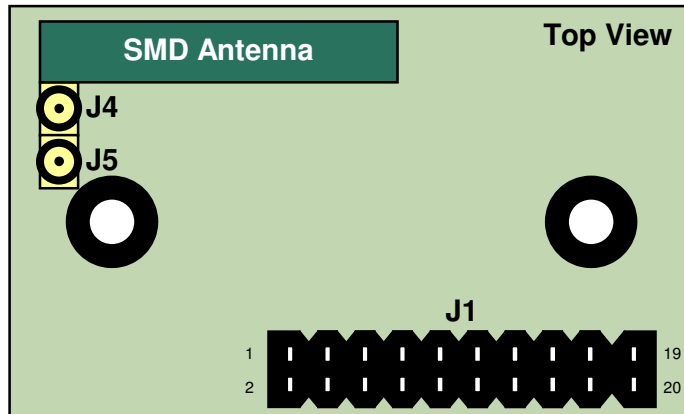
Top view of the PCB with the pinning of the J1 connector.
